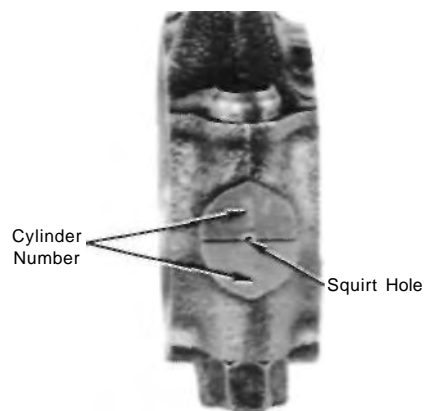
Connecting Rod Numbering and Squirt Hole Location
